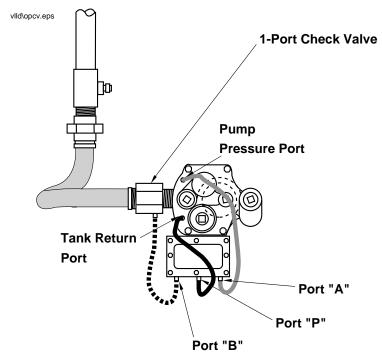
Typical Red Jacket VLLD Installation (top view, horizontal check valve mount)
